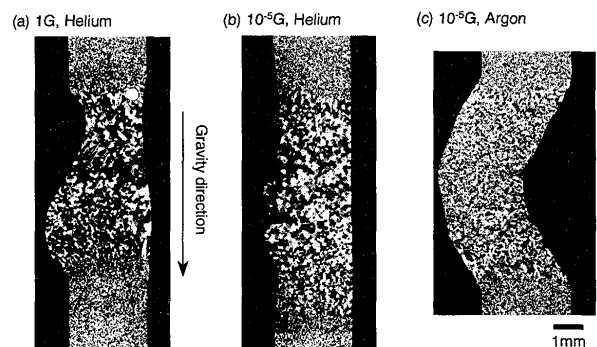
Transverse sections of butt welds formed with GTA welding in horizontal position.
